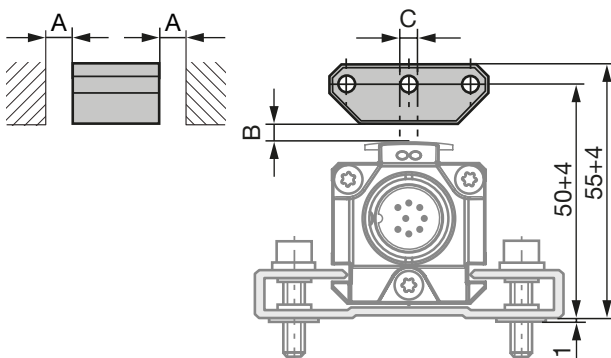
Dimensions and distances with BTL5-P-3800-2 magnet
